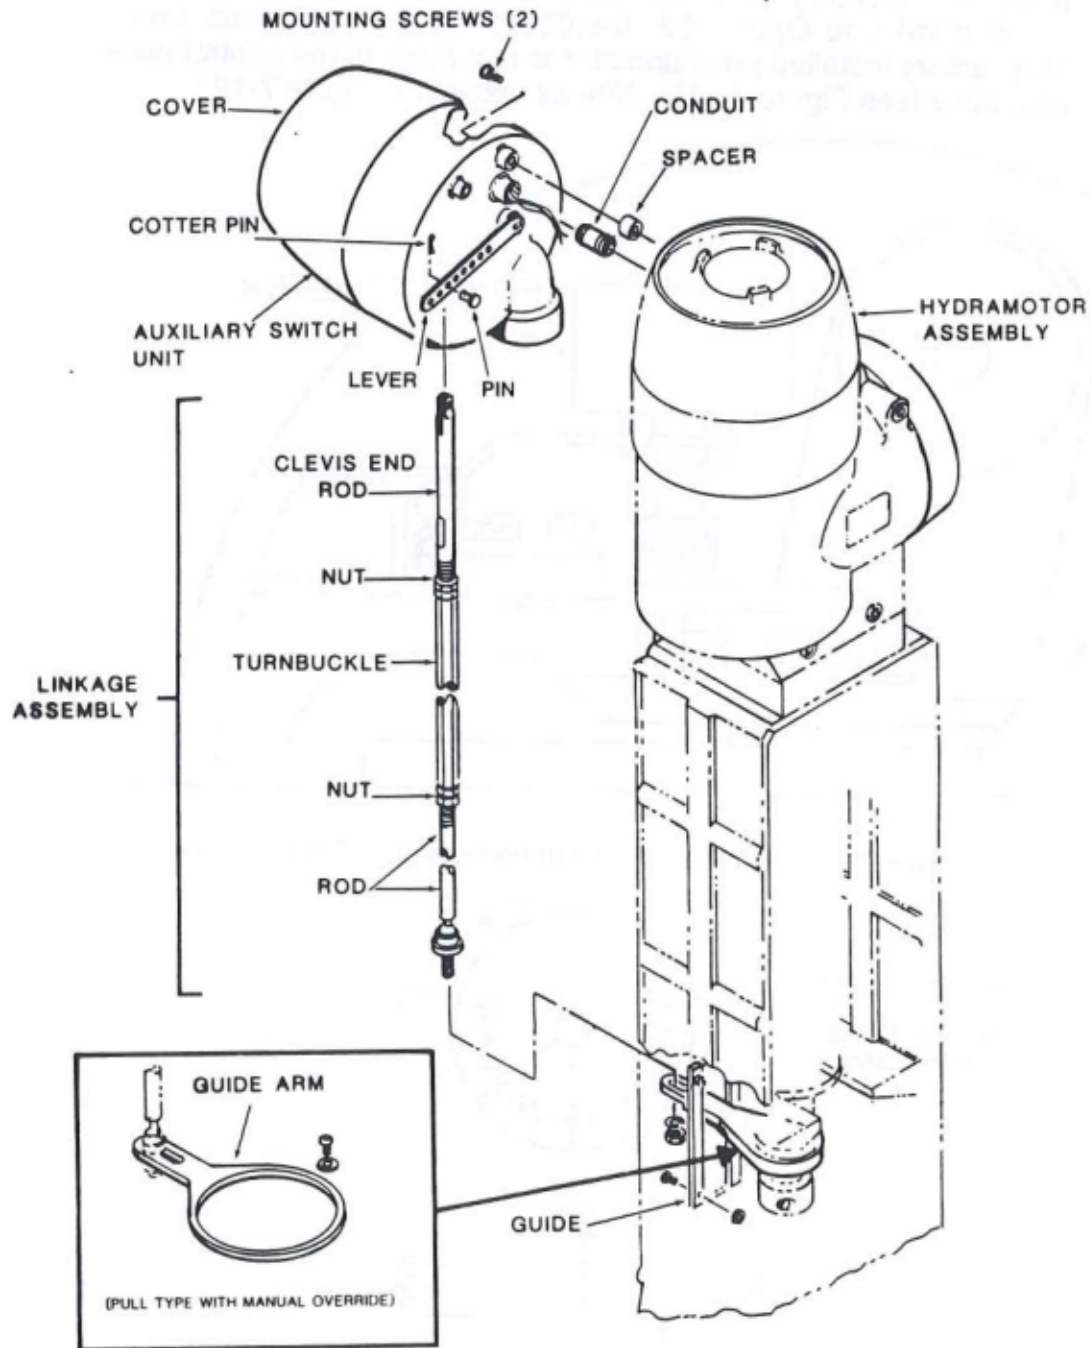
Auxiliary Switch Box and Linkage to Hydramotor Shaft
